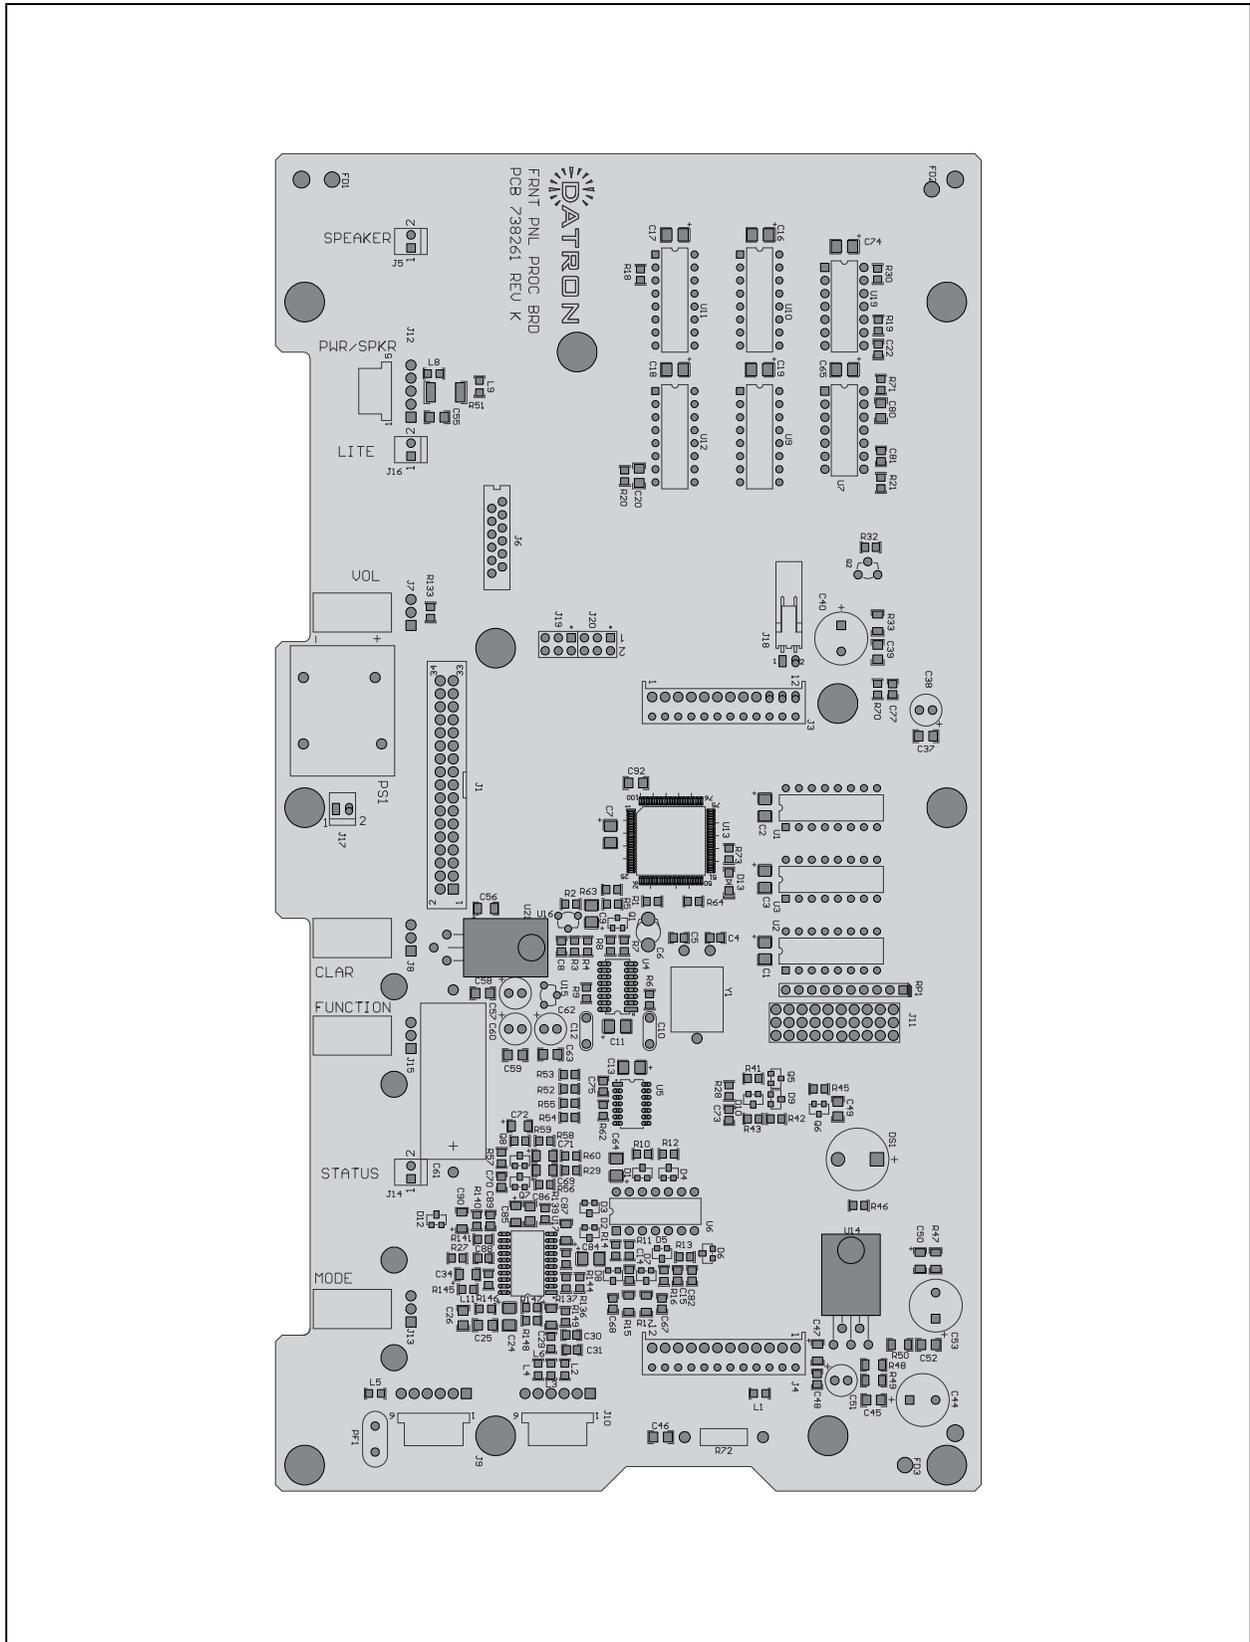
Front Panel Assembly Component Locations (738261 Rev. K)
